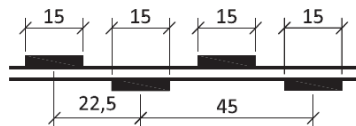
Application of dimensions to intermittent fillet welds.
